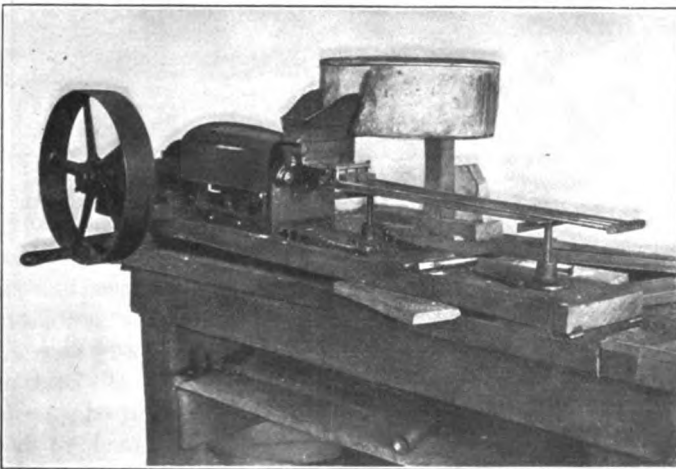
ACME PLUNGER CORE MACHINE FITTED FOR MAKING 1-IN. SQ. CORES
